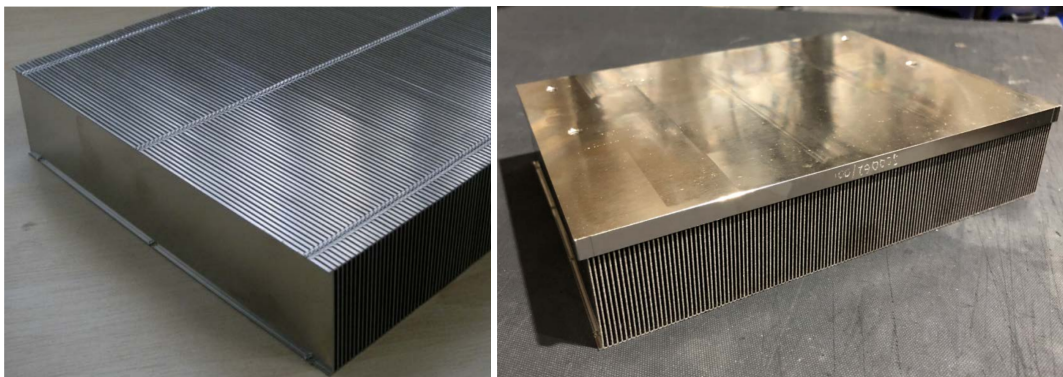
Left: Cassette fin stack. Right: Innovative heat sink manufactured, with heat sink base soldered with the cassette fin stack.
